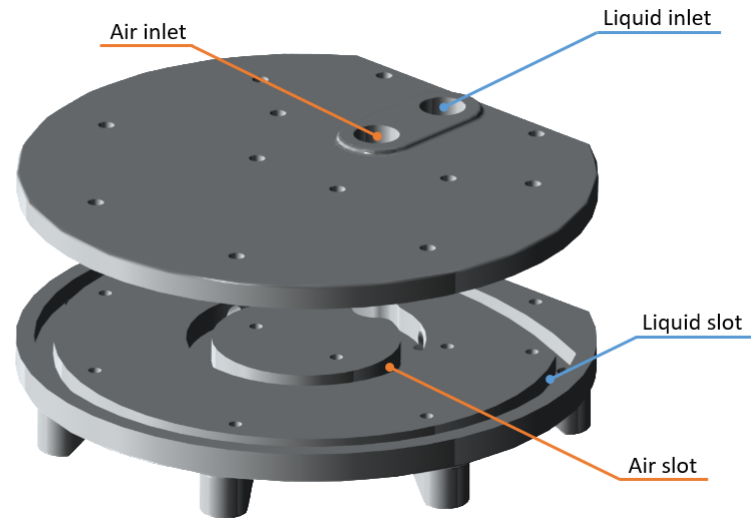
Design of the Divided Prototype shown in an exploded view, seen from above.
